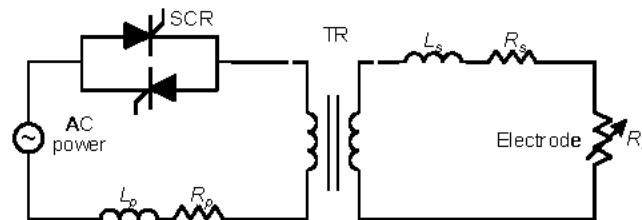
Equivalent welding machine circuit including practical transformer
